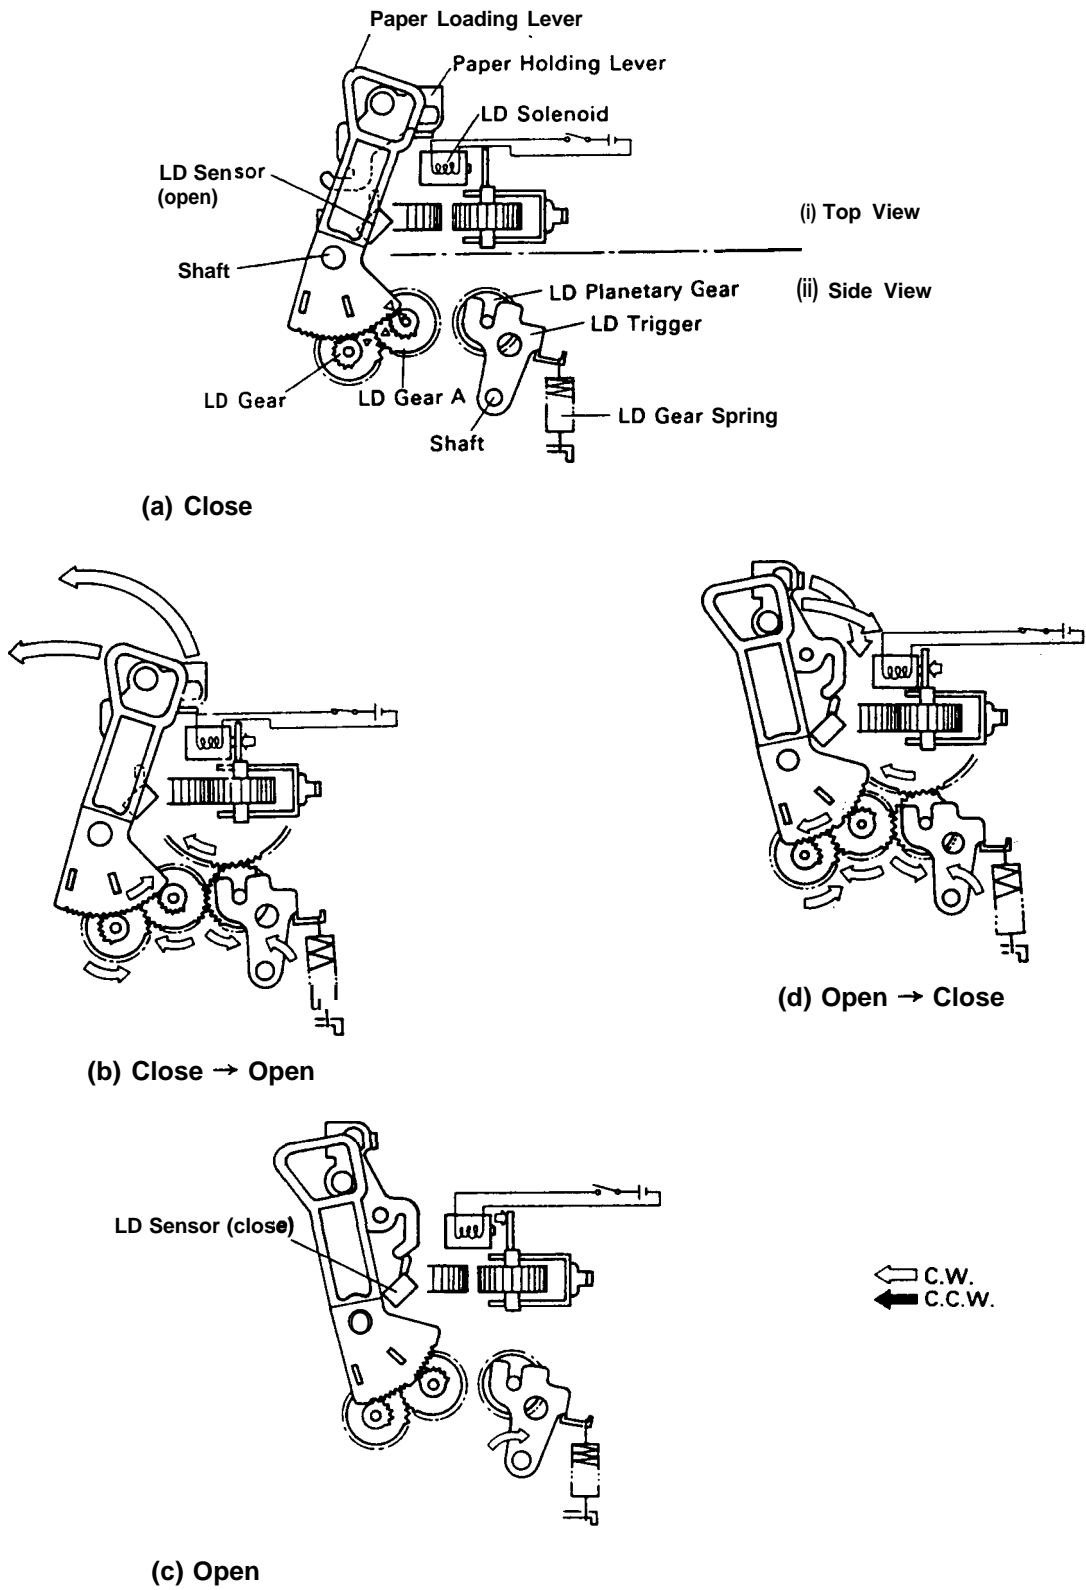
Paper Loading Lever Open/Close Mechanism Operation
